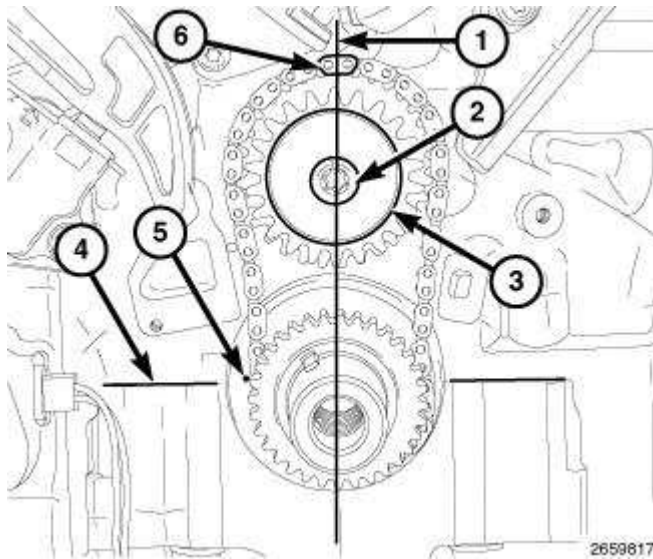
Timing Chain Plated Link At 12 O'Clock, Washer, Retaining Bolt, Block/Bearing Cap Junction & Dimple
